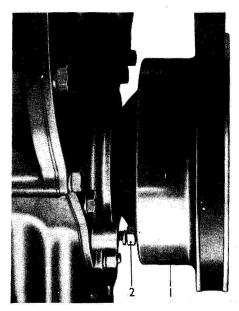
1. CRANKSHAFT PULLEY; 2. TIMING PEG
